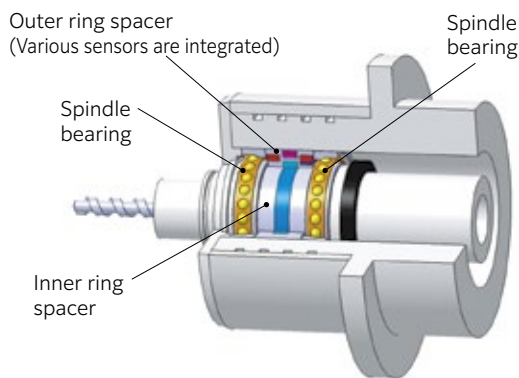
"Sensor Integrated Bearing Unit" for Machine Tool Spindles⁴
